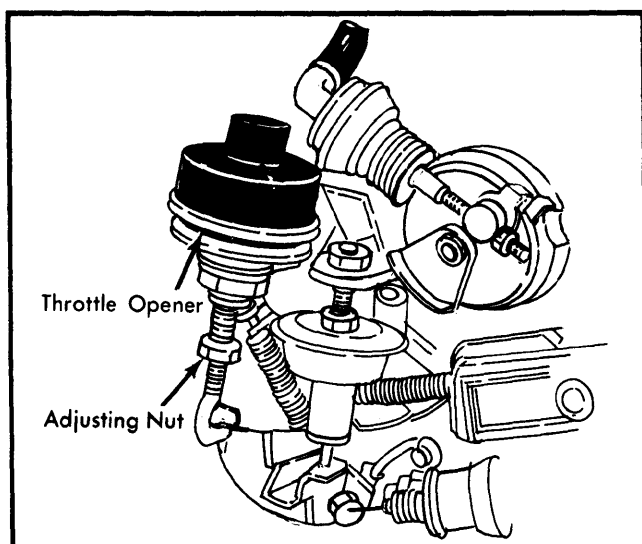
Adjusting Throttle Opener (A/C Models Only)
